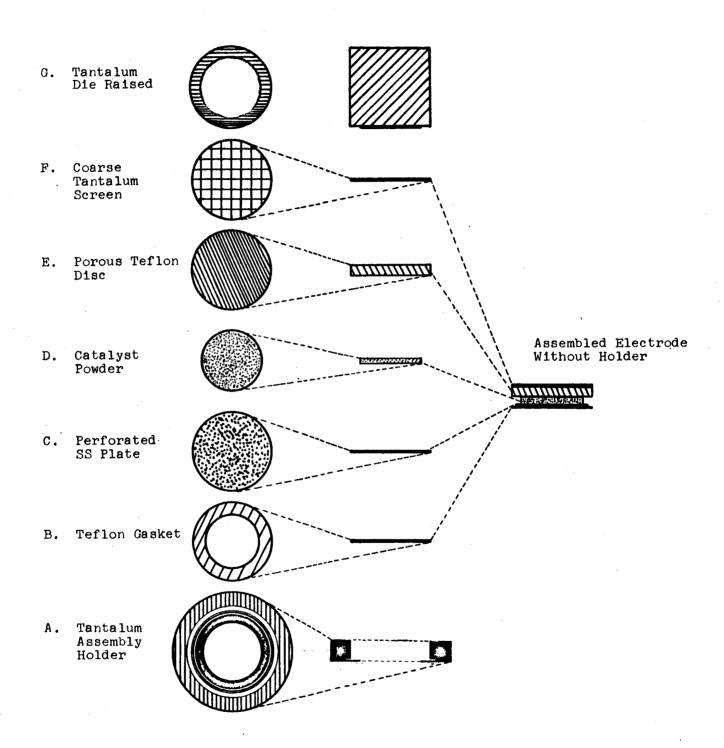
Exploded View of Porous Teflon Vapor Diffusion Electrode
